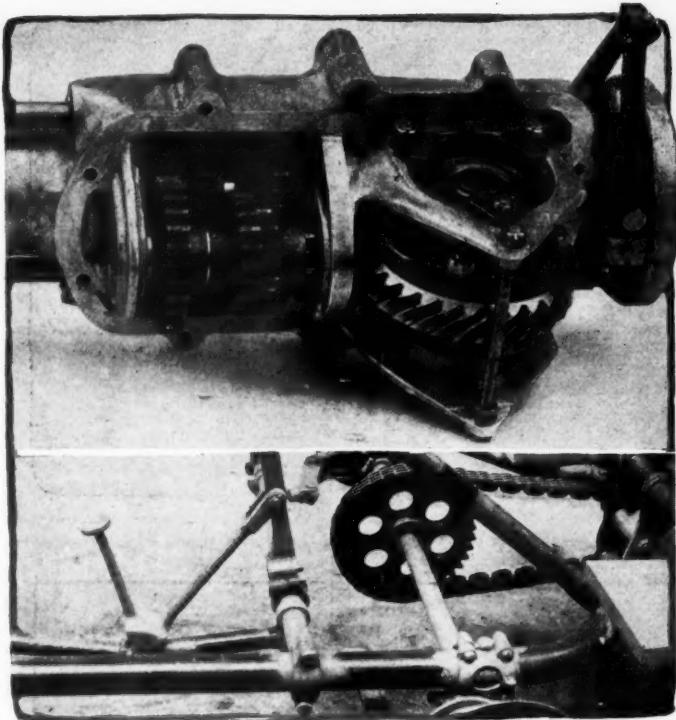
On top—Unit gearbox with worm reduction to rear axle and disk brake in rear of axle on 10-horsepower Auto-Carrier light car
